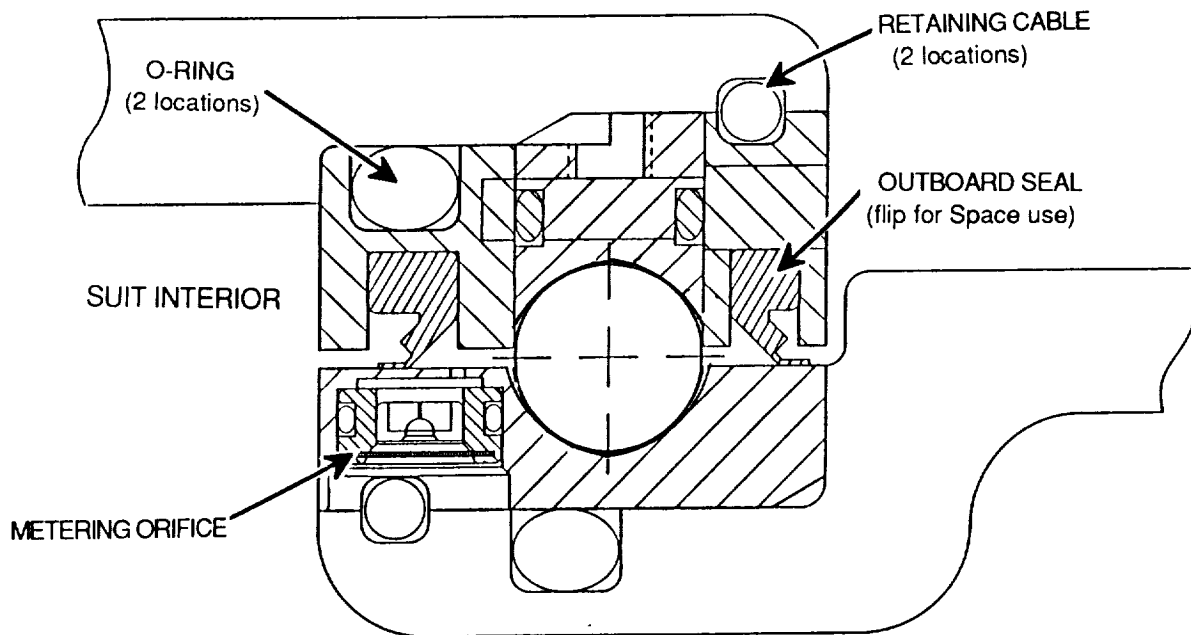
AX-5 Bearing Joint Configuration for Underwater Tests
